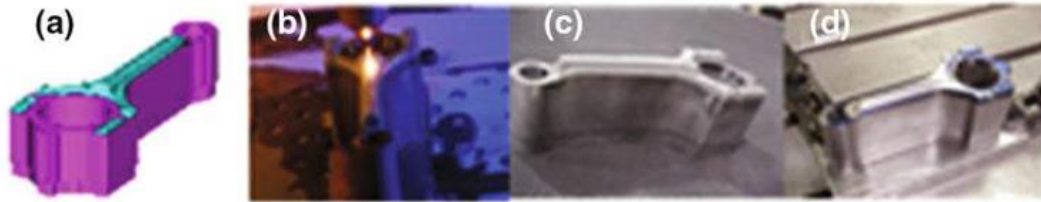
Case study by DM3D Technology of a forging tool modified with cobalt-based alloy coating using the DMD process; a) CAD model showing tool base and DMD coating, b) DMD process in action, c) MD deposited tool, d) finish machined tool.
